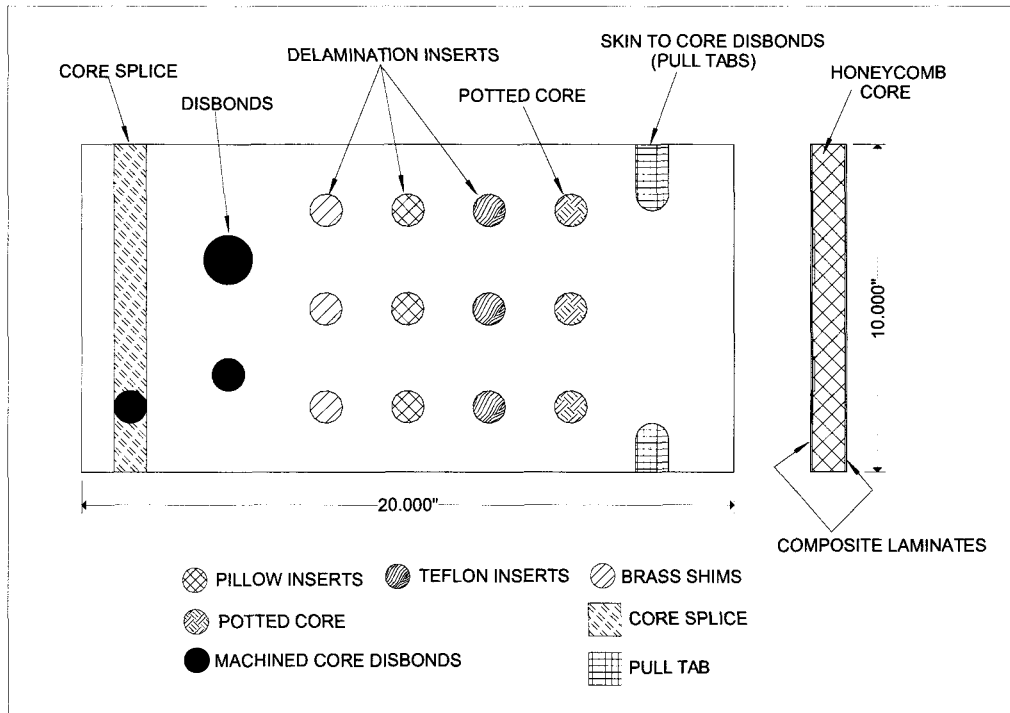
Engineering Drawing to Evaluate Honeycomb Reference Standard Design and Fabrication
